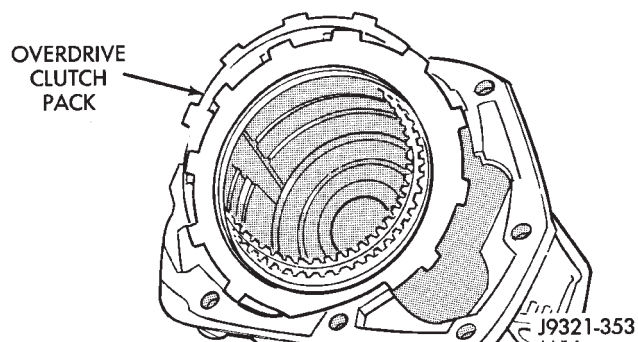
Overdrive Piston Thrust Plate Removal/Installation
